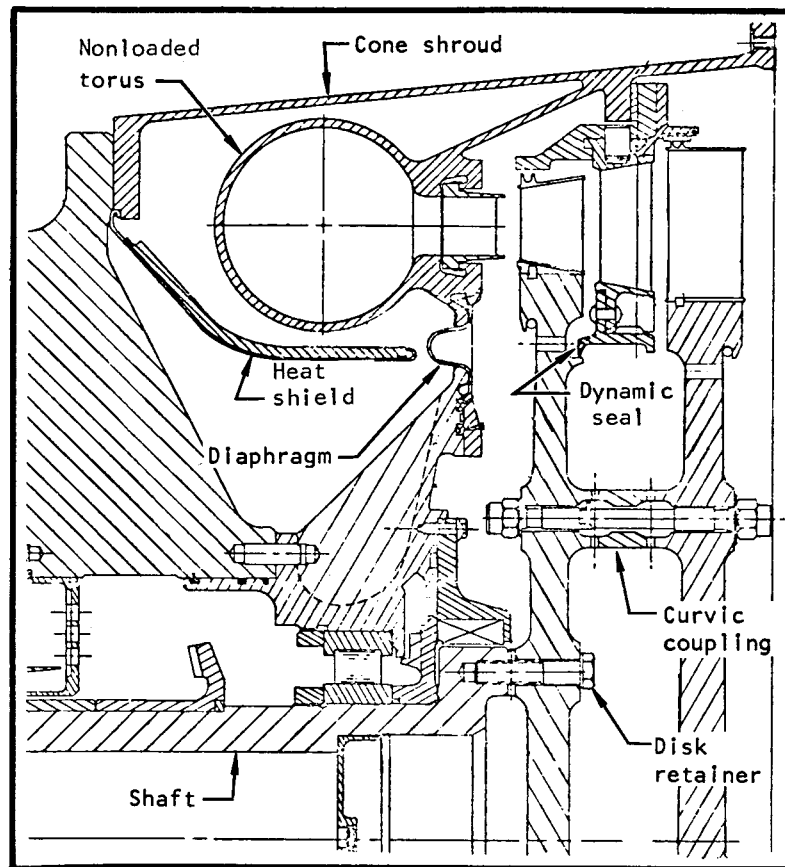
Alternate design, Mark 10 turbine assembly (F-1 engine).
